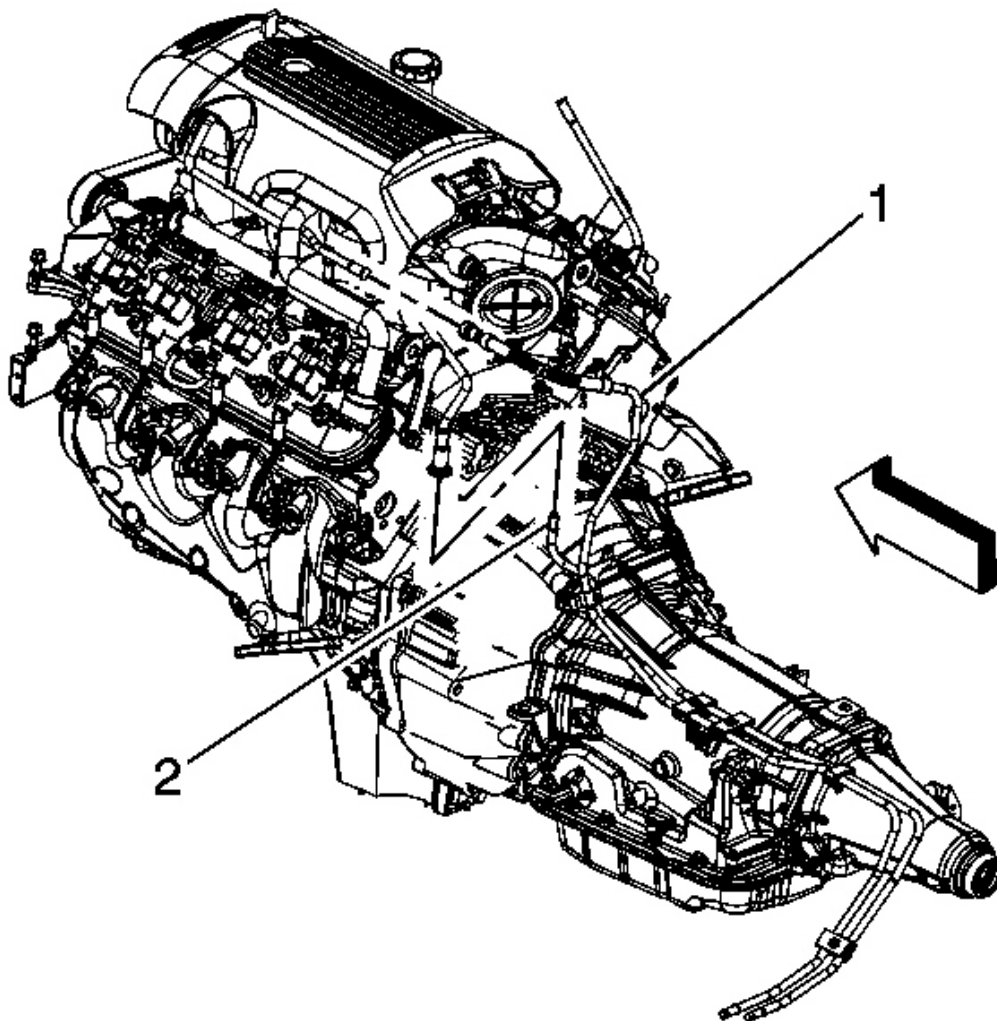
Identifying Fuel Feed & EVAP Pipes
